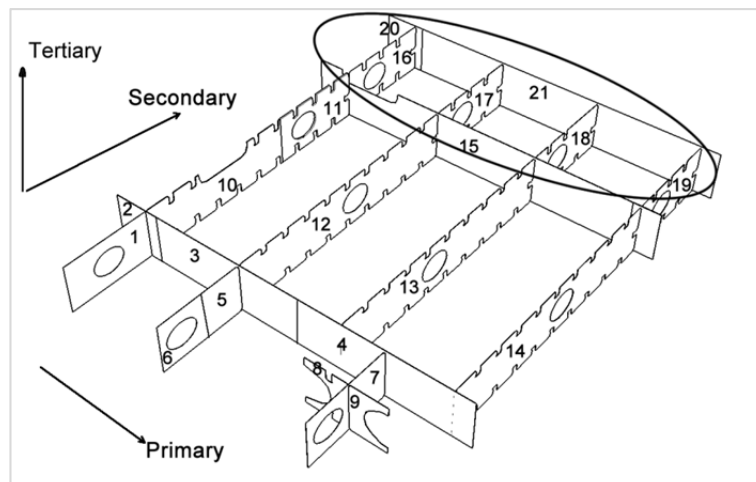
Final Assembly Parts Highlighted of Figure 4-17
